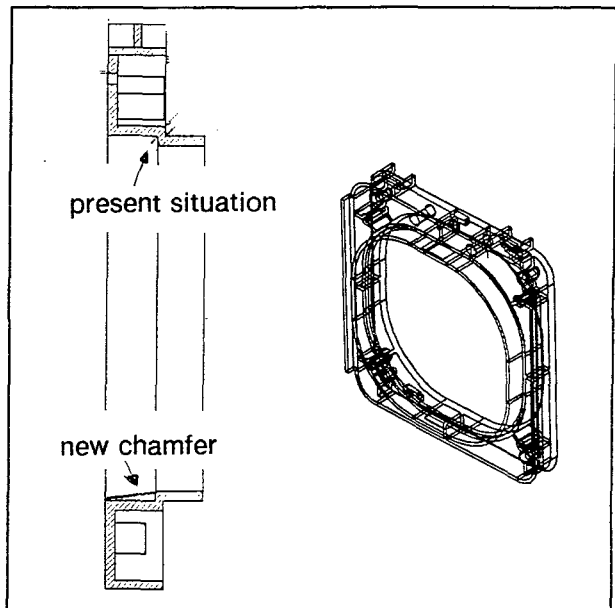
Chamfer on insulating ring makes mounting easier and faster
